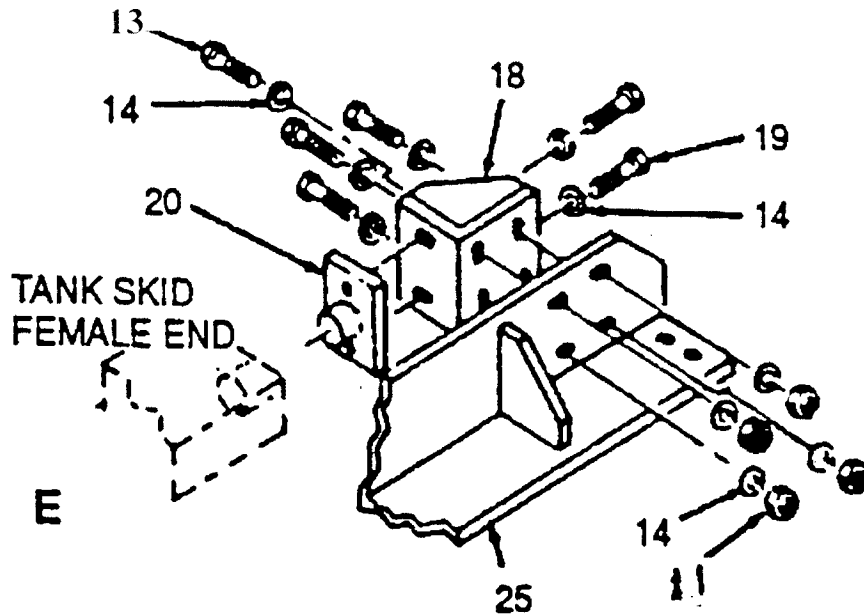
Angle/Bracket/Socket Adapter Assembly.
